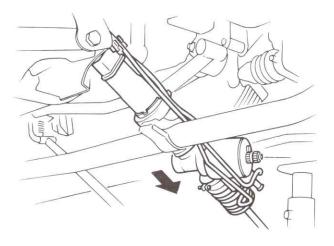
Removing a power-assisted steering rack (Sec 12)
